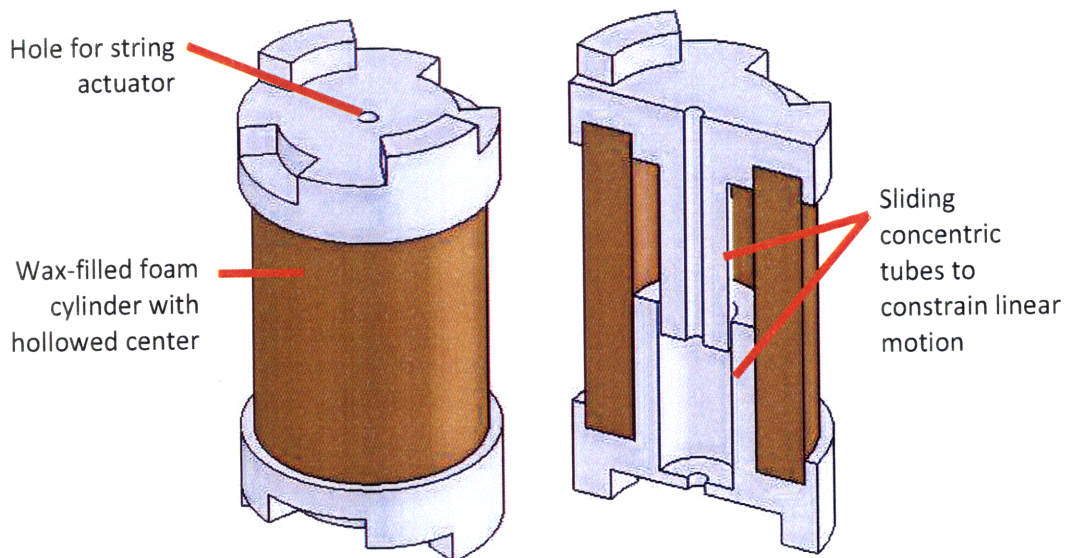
CAD model for compression module that can be integrated into spine mechanism.
